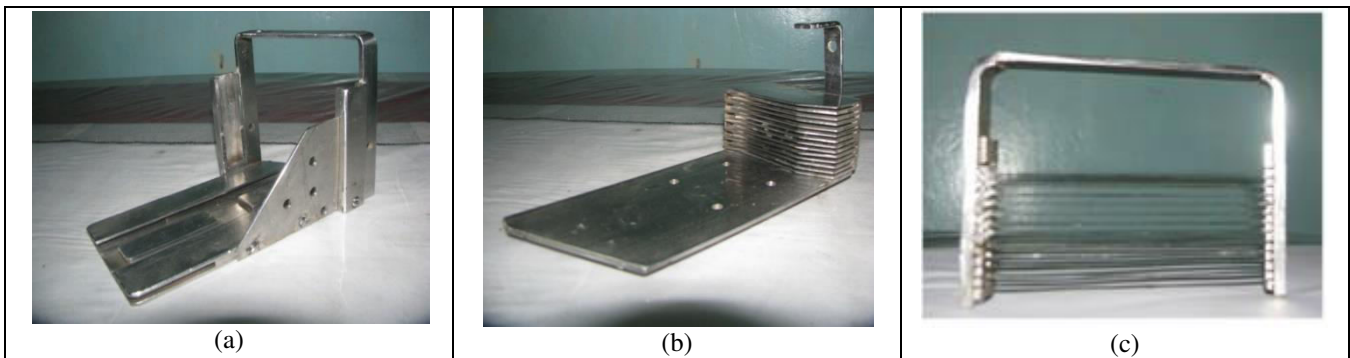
(a) The base assembly which has t-slots for the alignment of the pusher, (b)The pusher assembly, (c) And the blade assembly.
